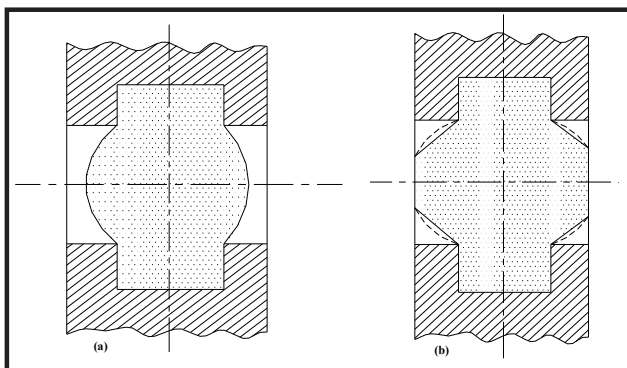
Deformation stages during flashless closed-die sinter-forging of cylindrical preform into double-hub flange component.
